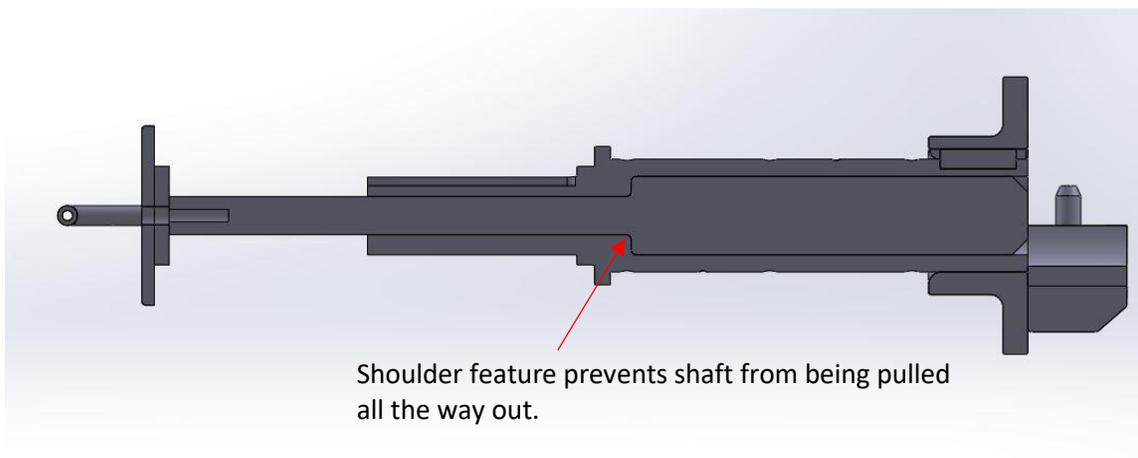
Drive End Iteration #2, Shaft Assembly Fully Retracted
